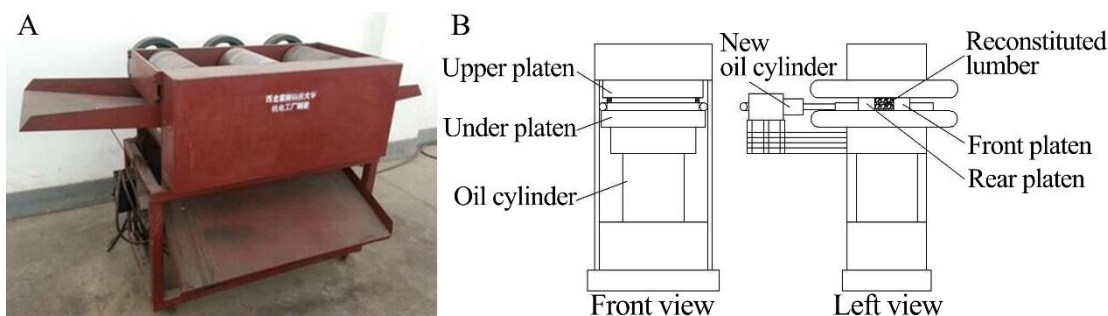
(a) Six-roll crusher and (b) schematic diagram of the four-side hot pressing machine
